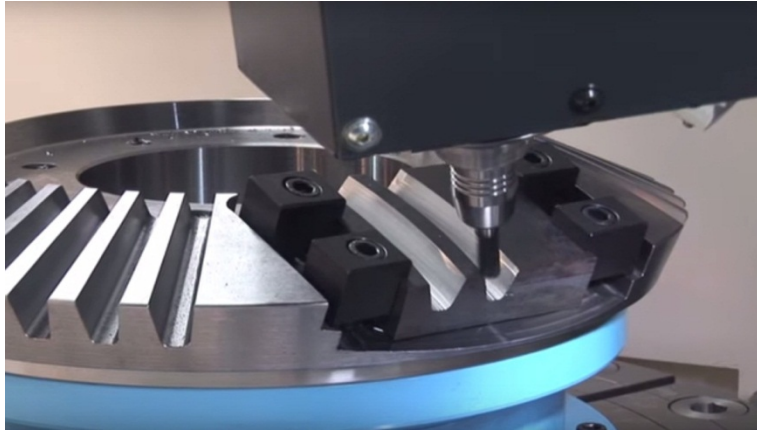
GEAR MANUFACTURING BY MEANS OF A 5-AXES MILL FOLLOWING AN ACCURATE 3D PATH
